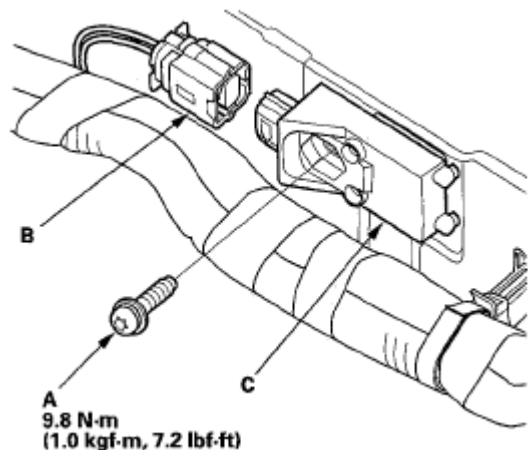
Identifying Floor Wire Harness 2P Connector And Roll Rate Sensor
